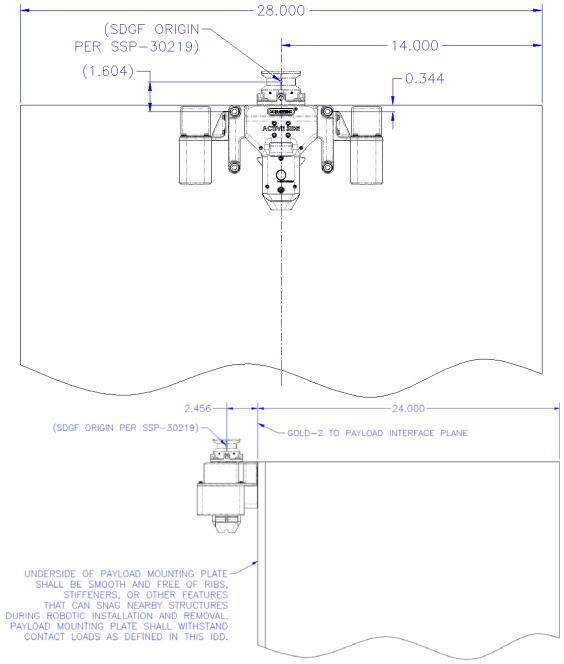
Location F GOLD-2 Installation Tolerance
